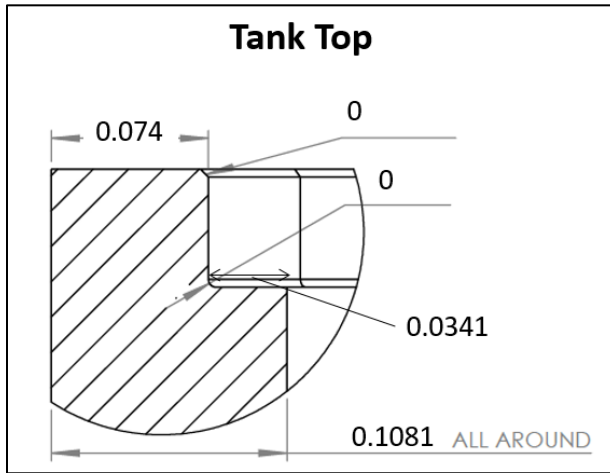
Worst case Weld Geometry – Tank Top
